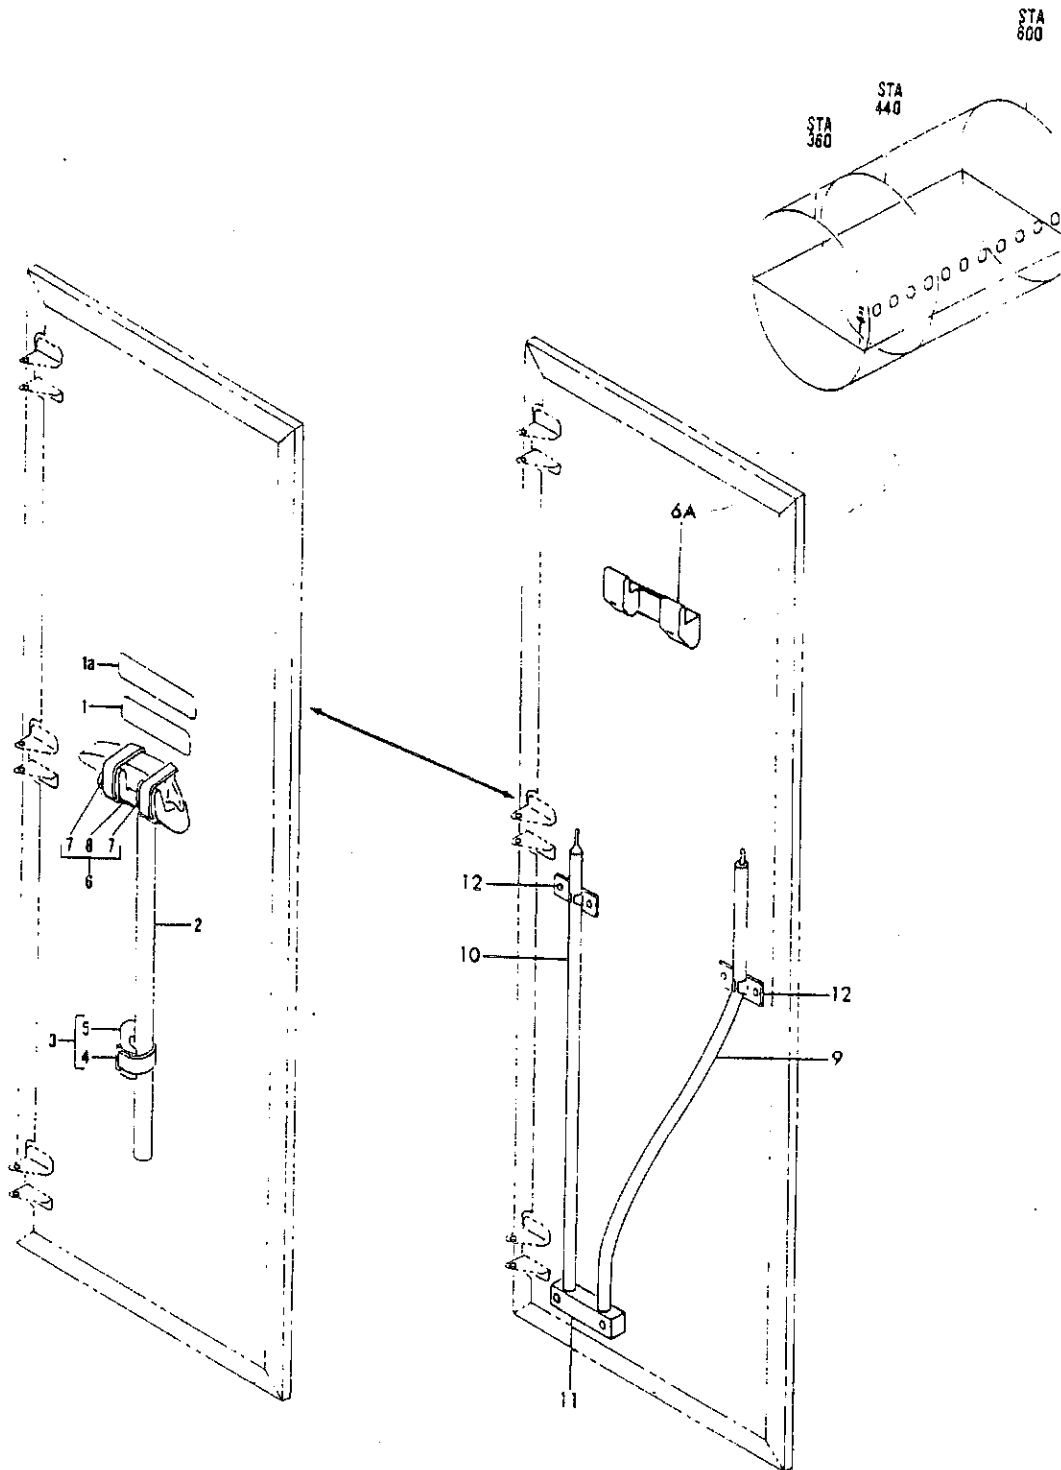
STOWAGE INSTL, STARTER VALVE OVERRIDE TOOL
